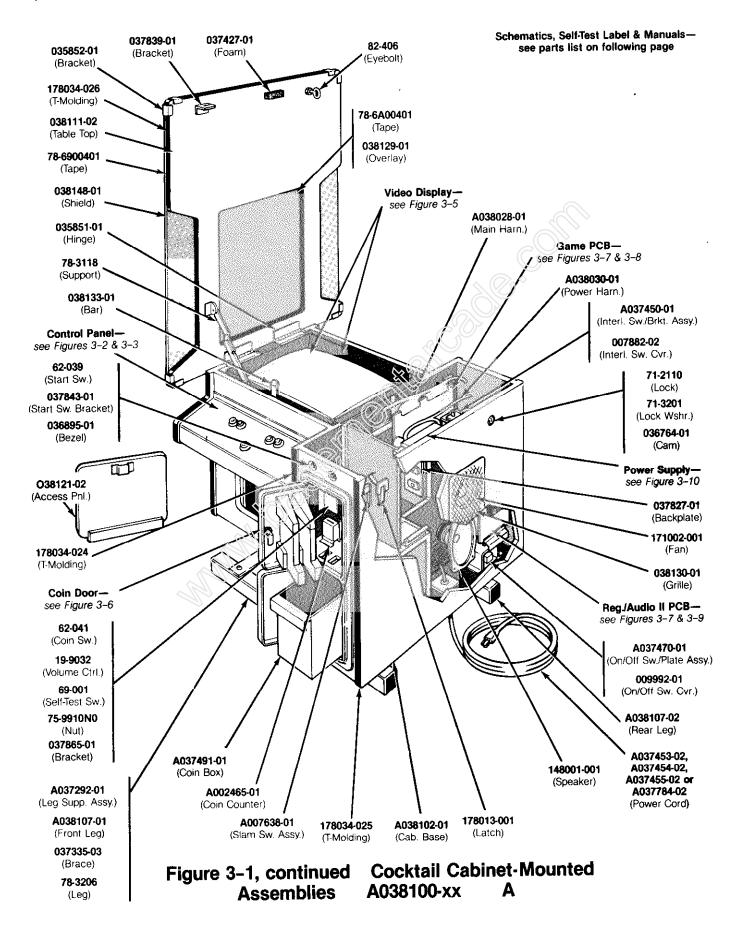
, continued Cocktail Cabinet-Mounted Assemblies Parts List
